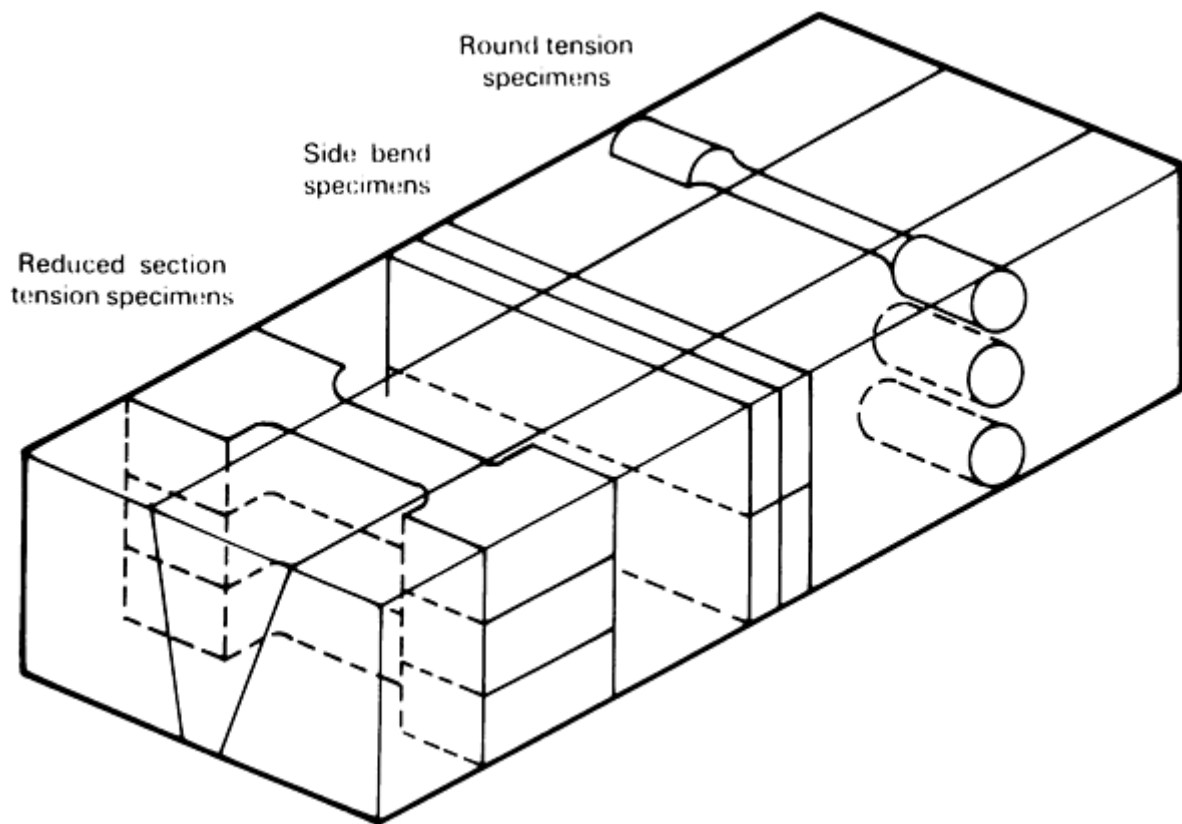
REMOVAL OF MULTIPLE BEND AND TENSION SPECIMENS FROM THICK TEST PLATES
